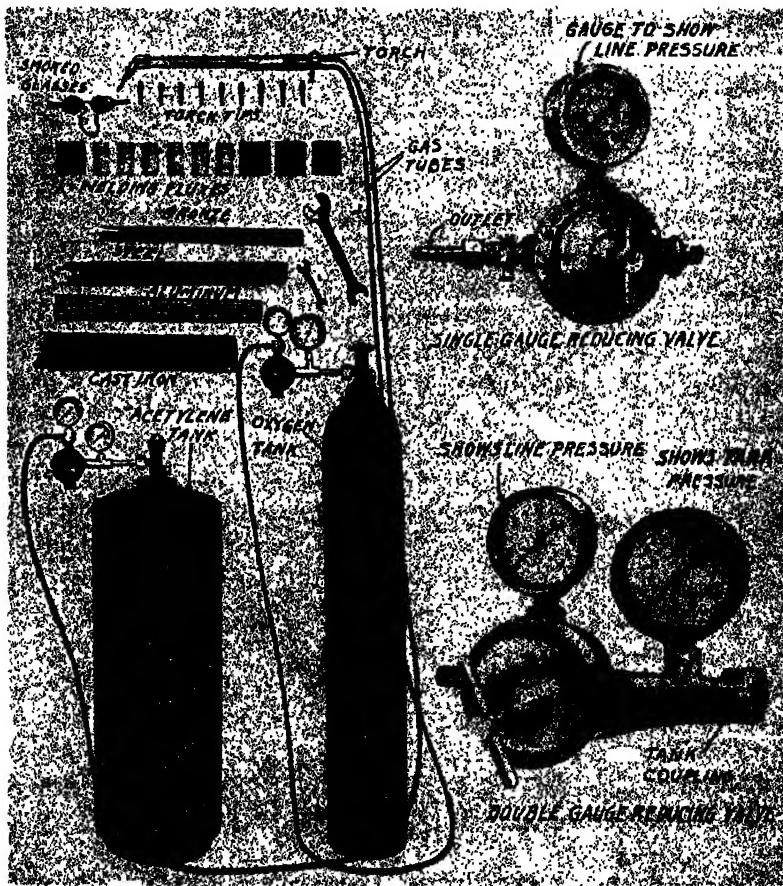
Complete Welding Outfit Suitable for Repair Shop Use.
